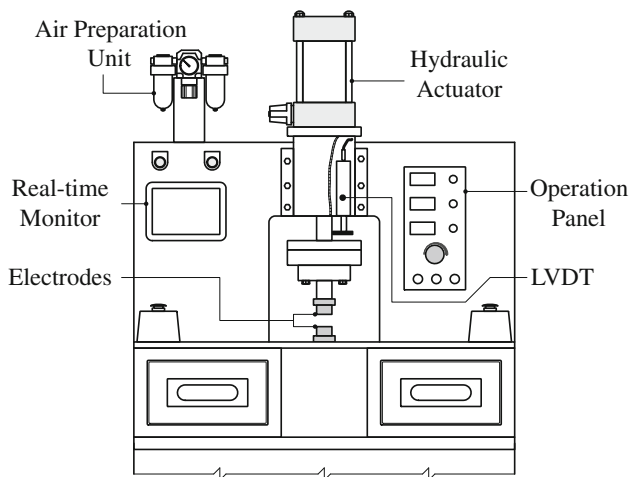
Schematic representation of the experimental device for resistance projection welding
